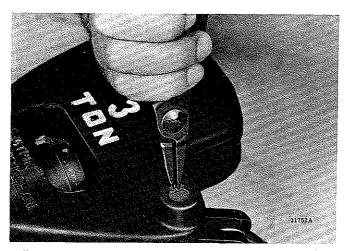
Removing Retaining Ring From Bore of Connecting Link Pin - 3 Ton Lower Block Assembly.
